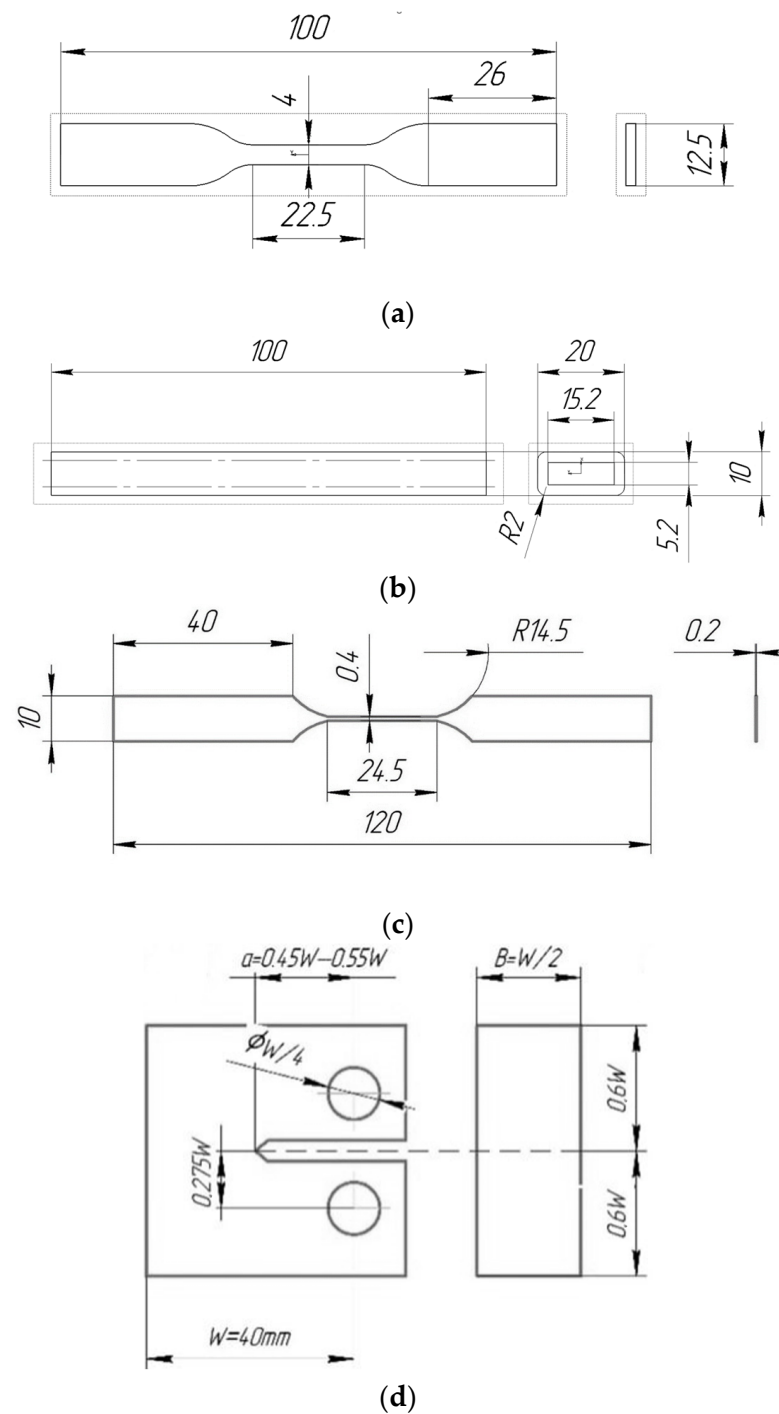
Dimensions of samples: (a) for tensile tests; (b) for bending tests; (c) monofilament tensile tests, (d) Geometry of CT sample.
